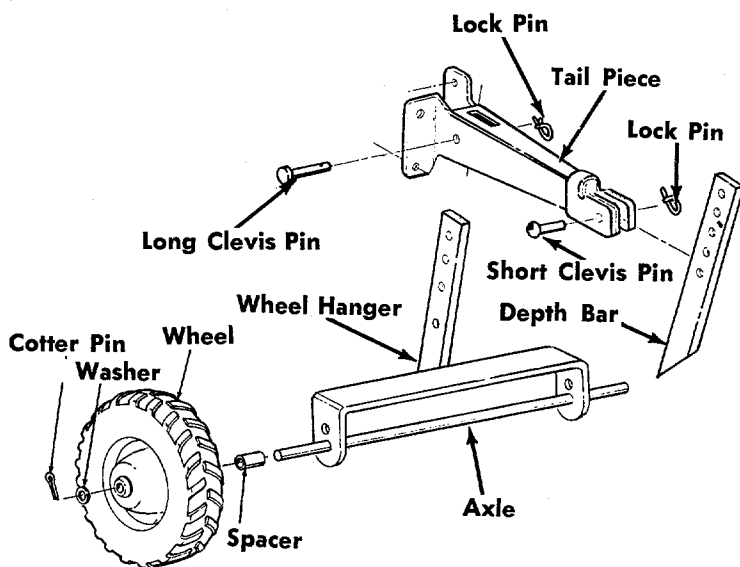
WHEEL AND DEPTH BAR ASSEMBLY
